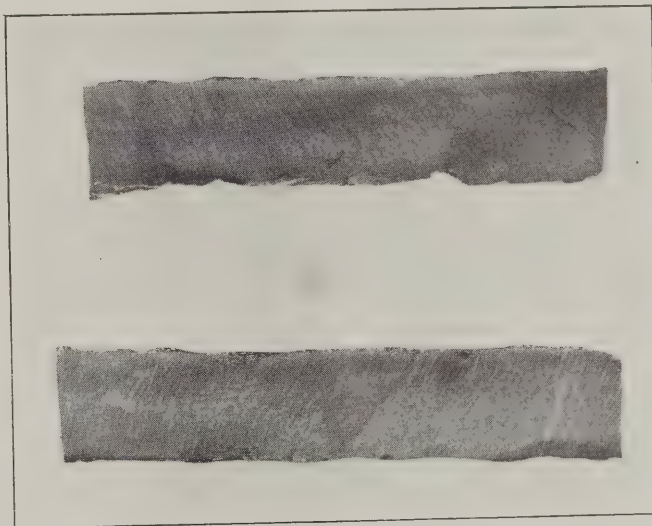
Photograph Showing Section of Arc Welds Using Monel Wire with Deoxidizer Coating. Absence of Blow-holes Should Be Noted
